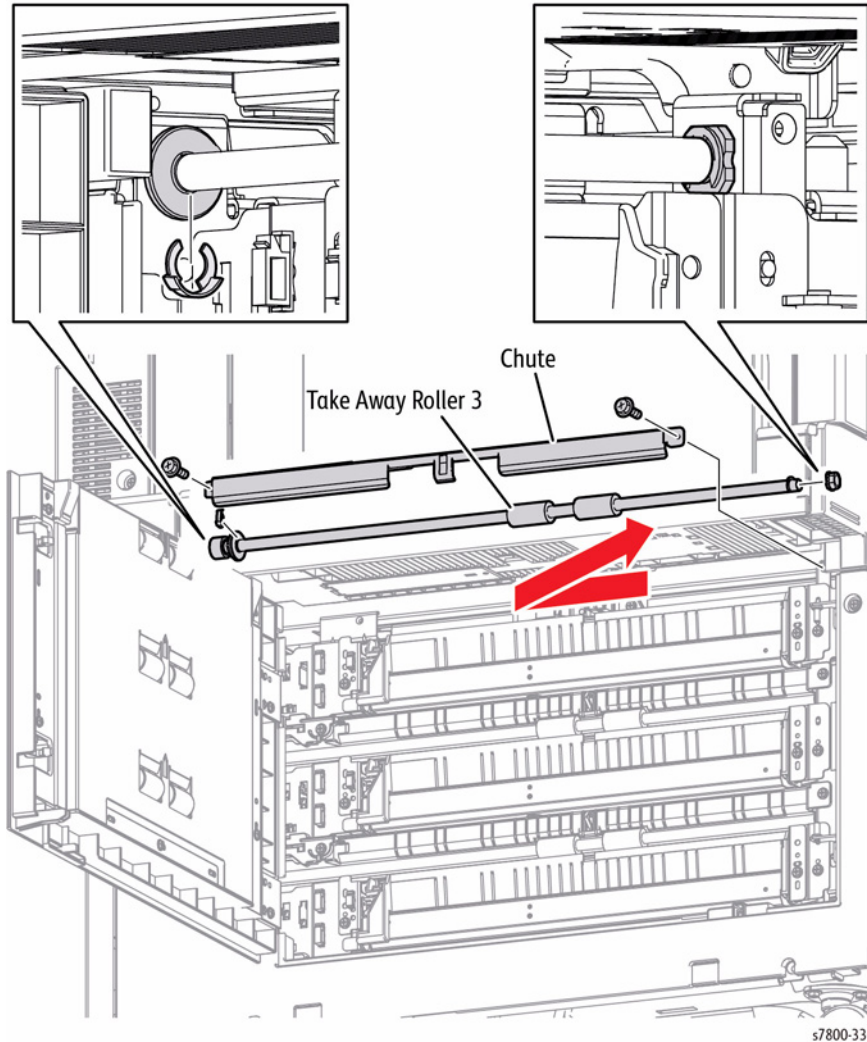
Removing the Take Away Roll 3/ 4/ 5
